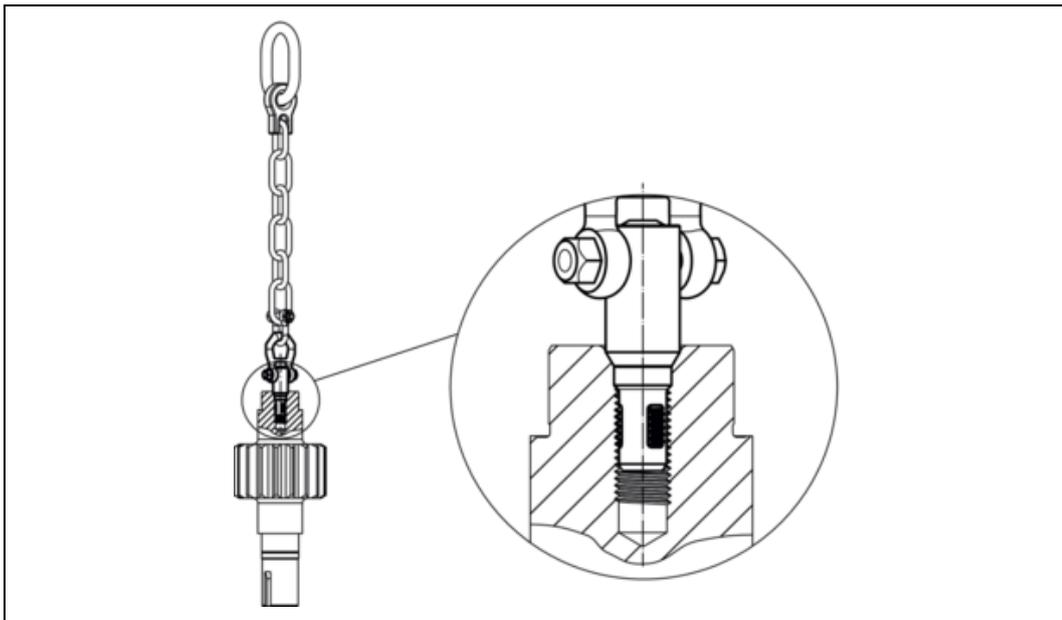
Installation examples - threaded lifting pins, self-locking, for centre holes according to DIN 332
